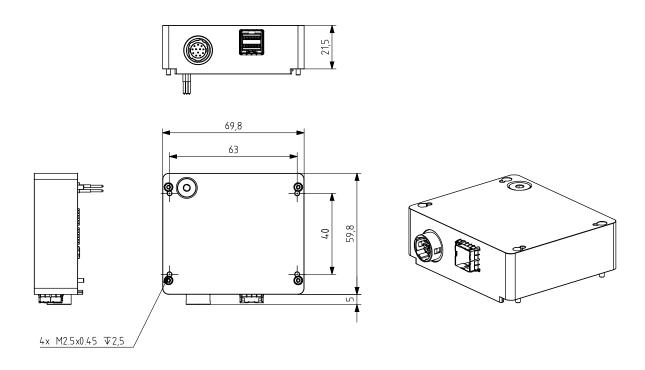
ADPT-MX-X4G3-FF-X4G3-SFF dimensional drawing
